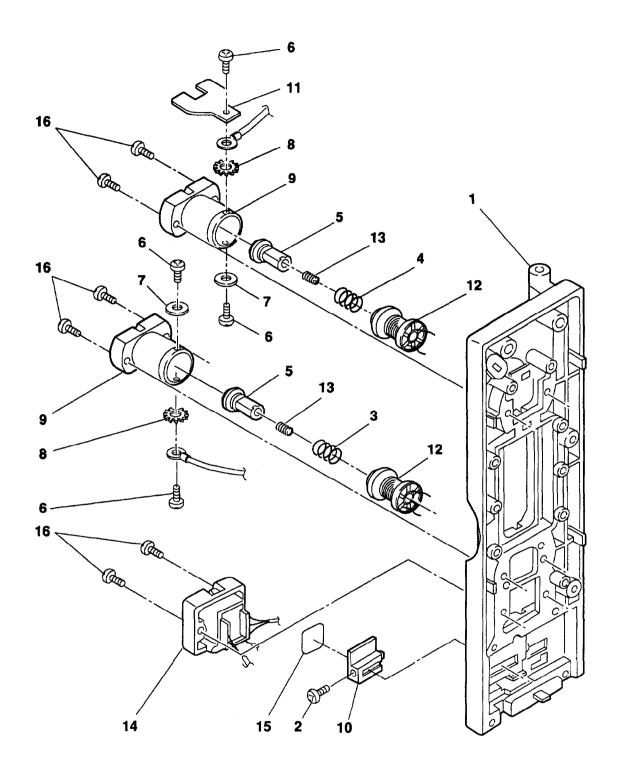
Pump 2 Base Plate Assembly-Rear
